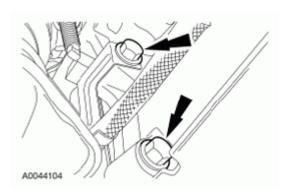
Locating Transmission-To-Engine Bolts Courtesy of FORD MOTOR CO.
